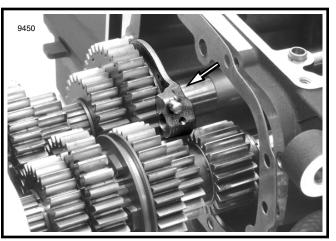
Install 5-6 Shifter Fork Onto Shift Ring
